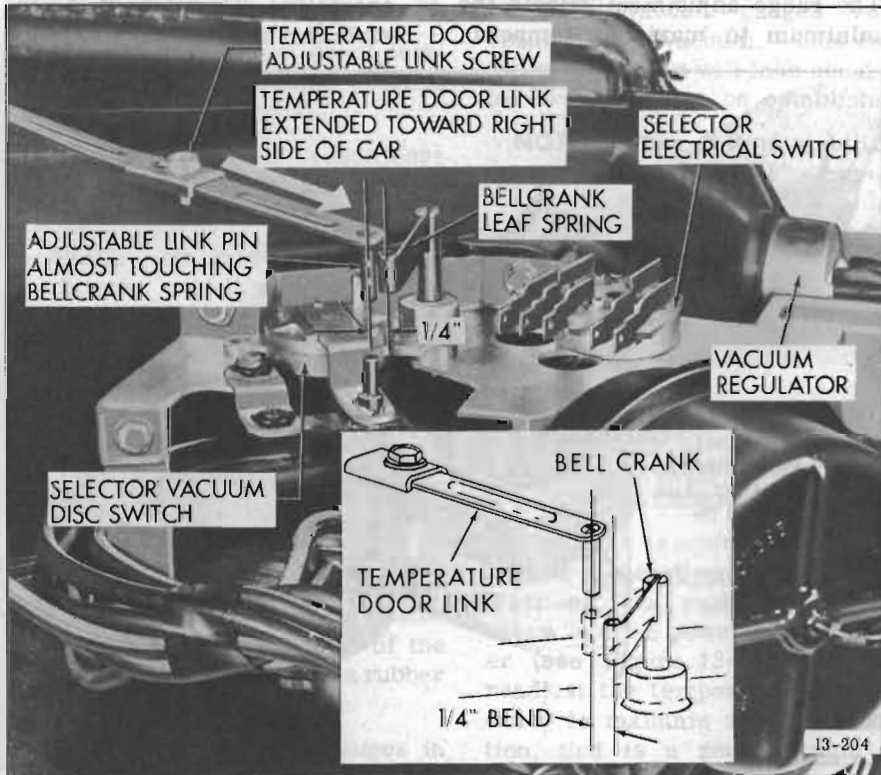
Checking Adjustment of Bell-crank Leaf Spring and Temperature Door Link (45-46-48000 Series)
